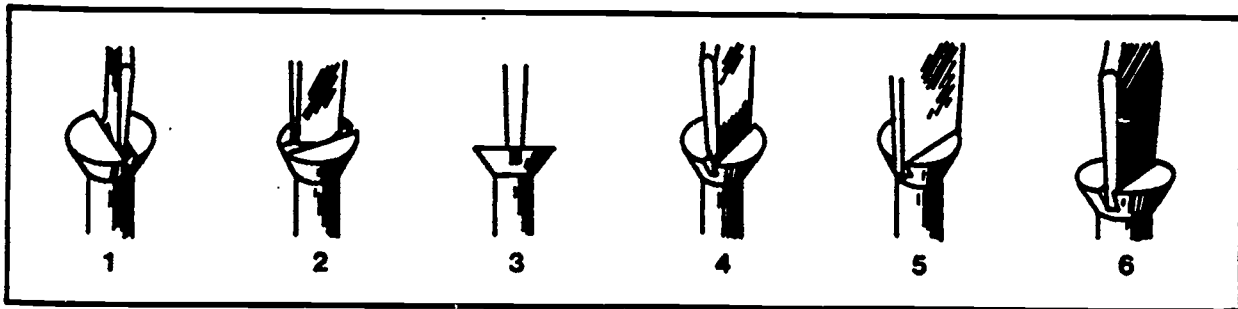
Proper and improper use of flathead screwdrivers. (The Hand Tool Institute)
